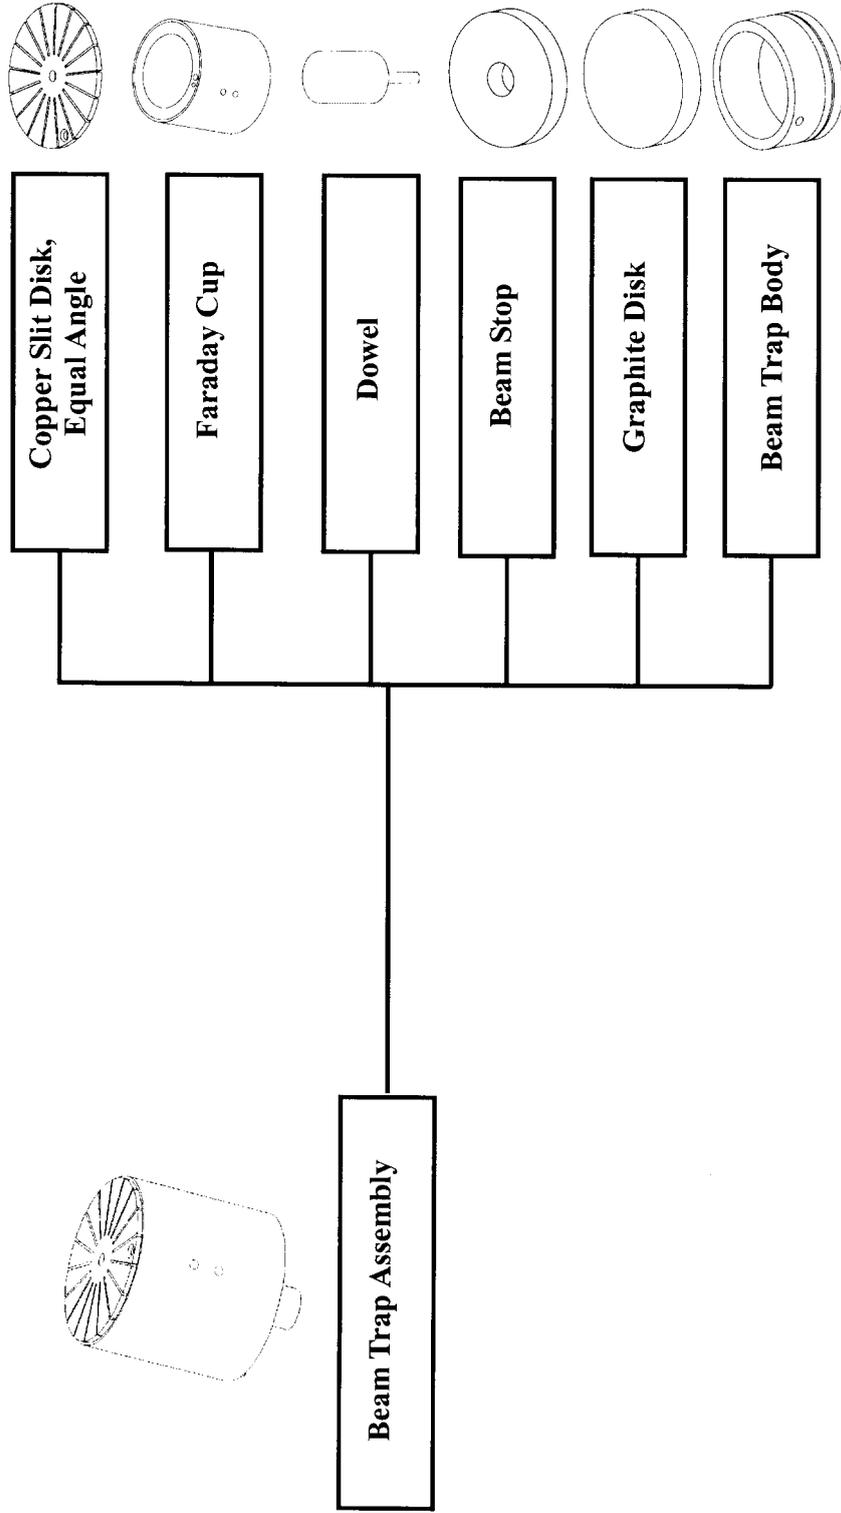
Exploded view of the components in the Beam Trap Sub-Assembly.
